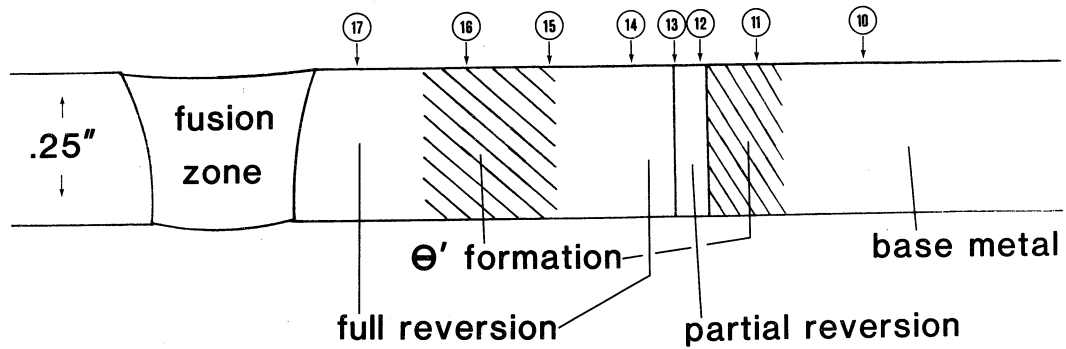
Schematic of Plate B after welding indicating the metallurgical regions observed.
